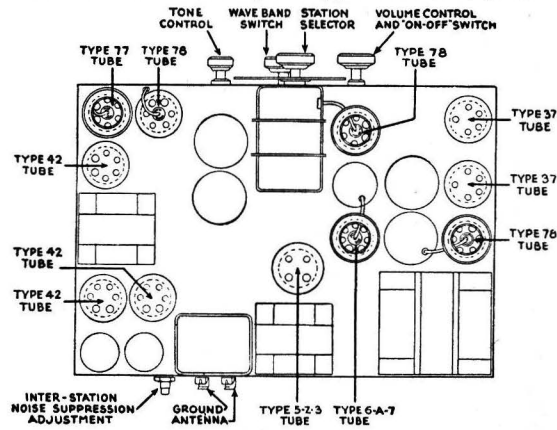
Top View of Chassis, showing Tube Locations, and Major Parts
